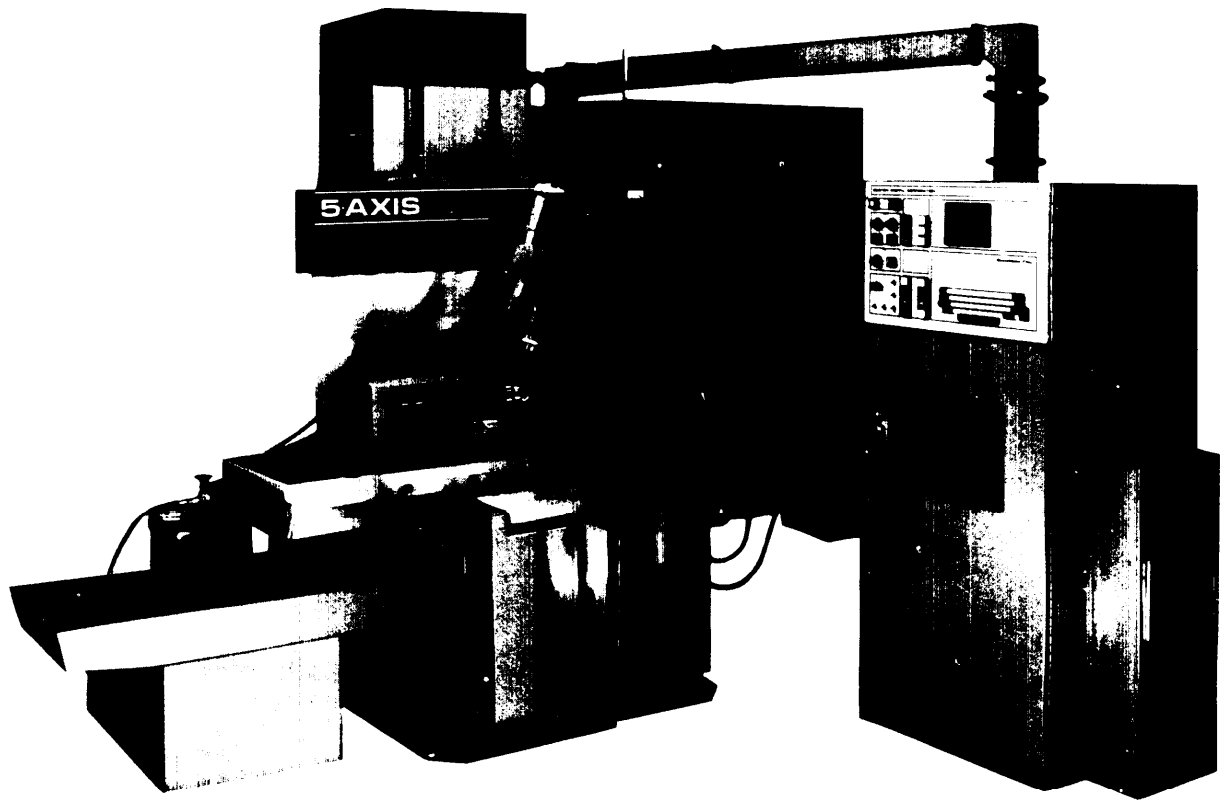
Five-axis, bed-type, vertical spindle, contouring milling machine. (Boston Digital Corporation)
